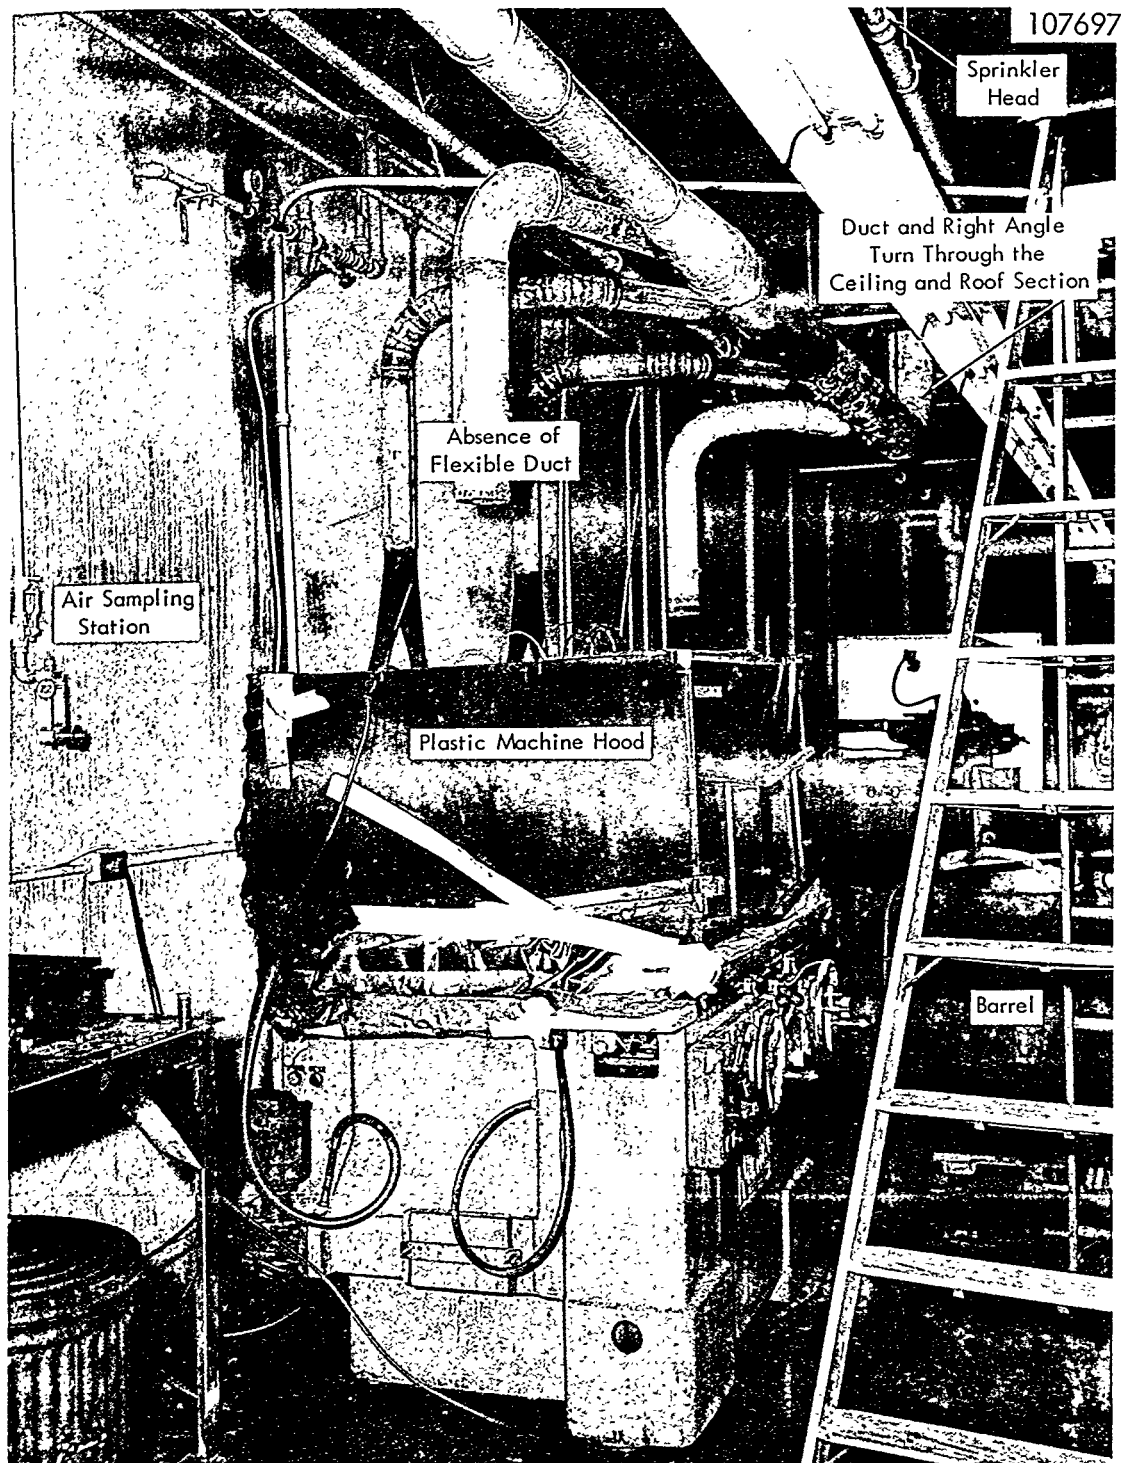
OVERALL VIEW OF HOODED GRINDER.
